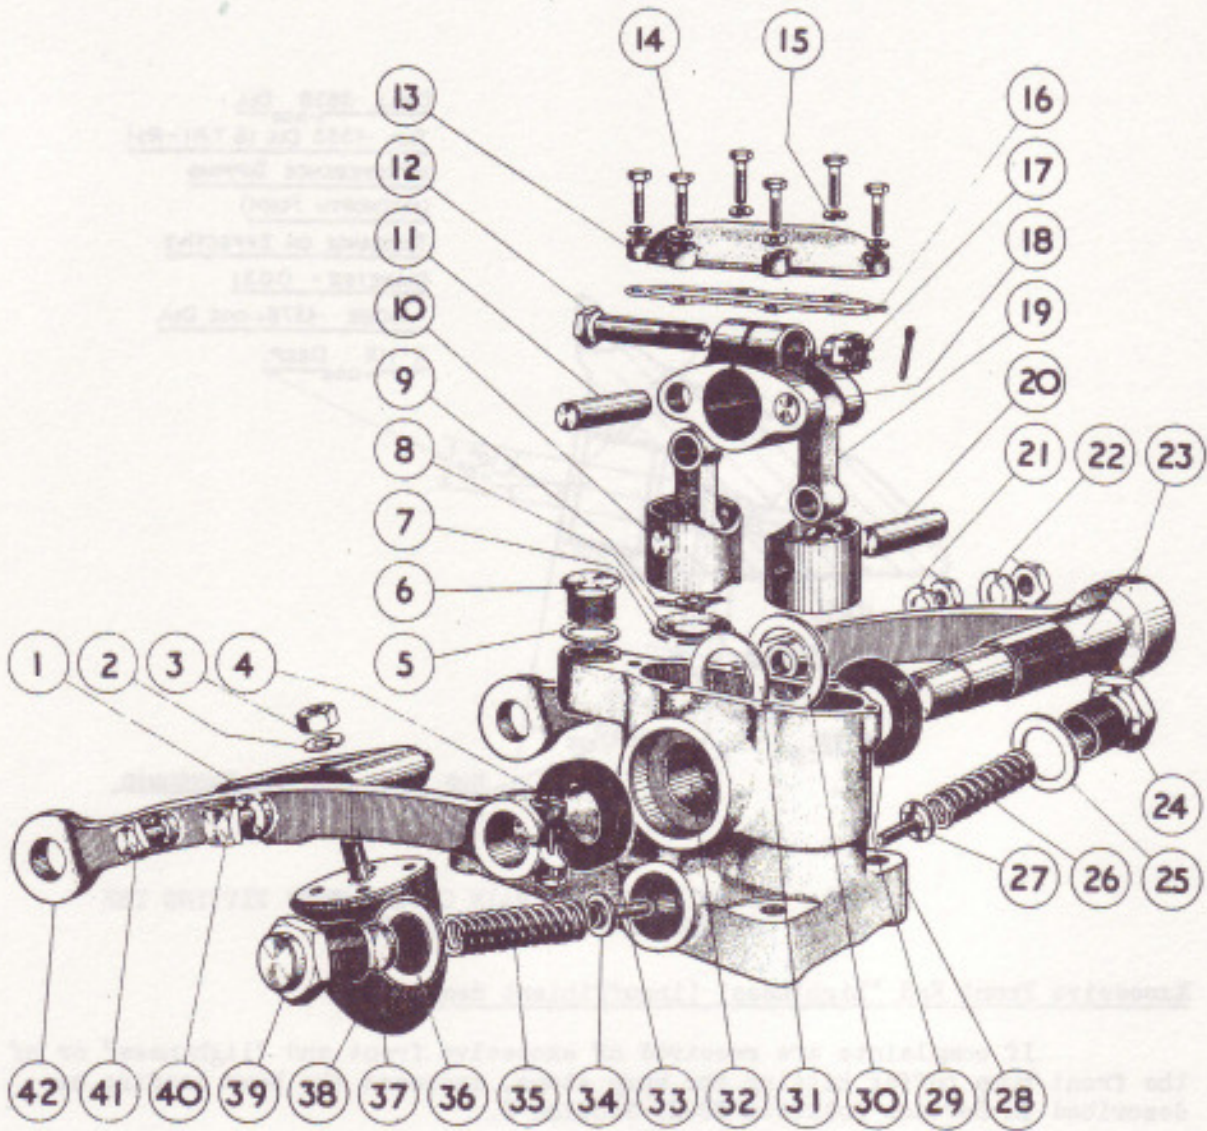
"EXPLODED" VIEW OF FRONT SHOCK DAMPER.
